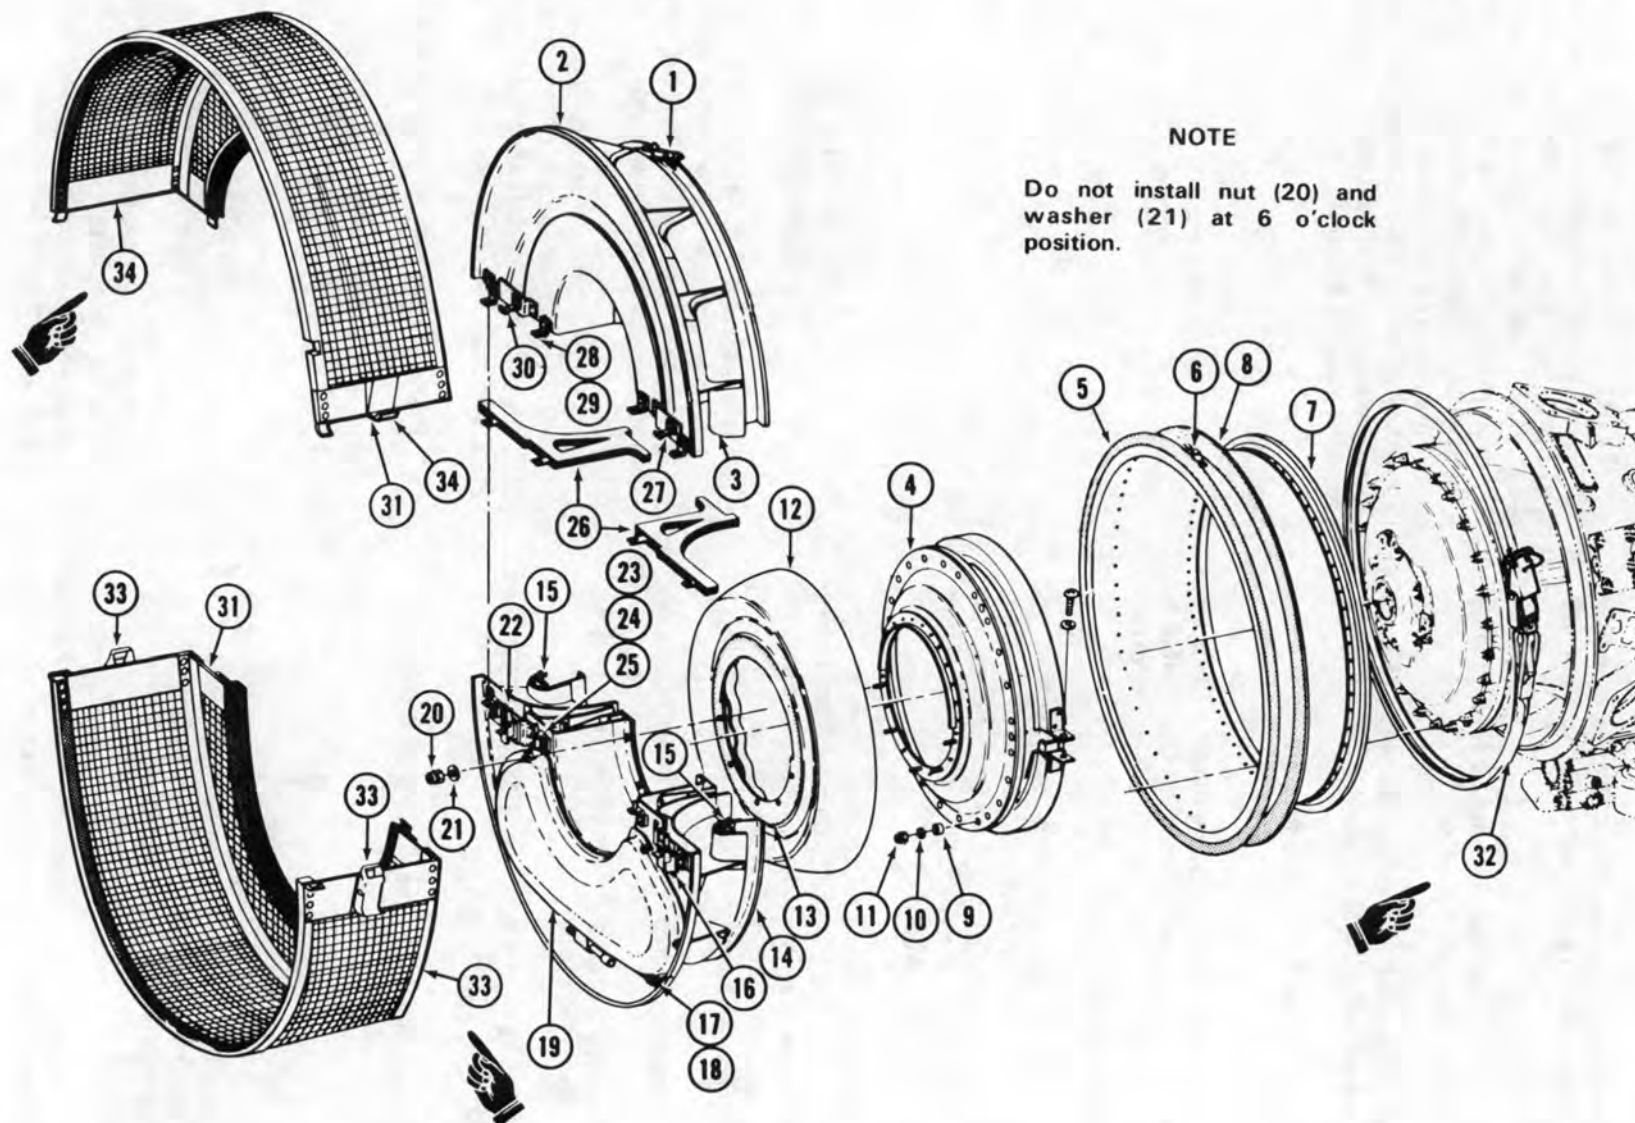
Particle Separator — Exploded View (Sheet 1 of 2)
